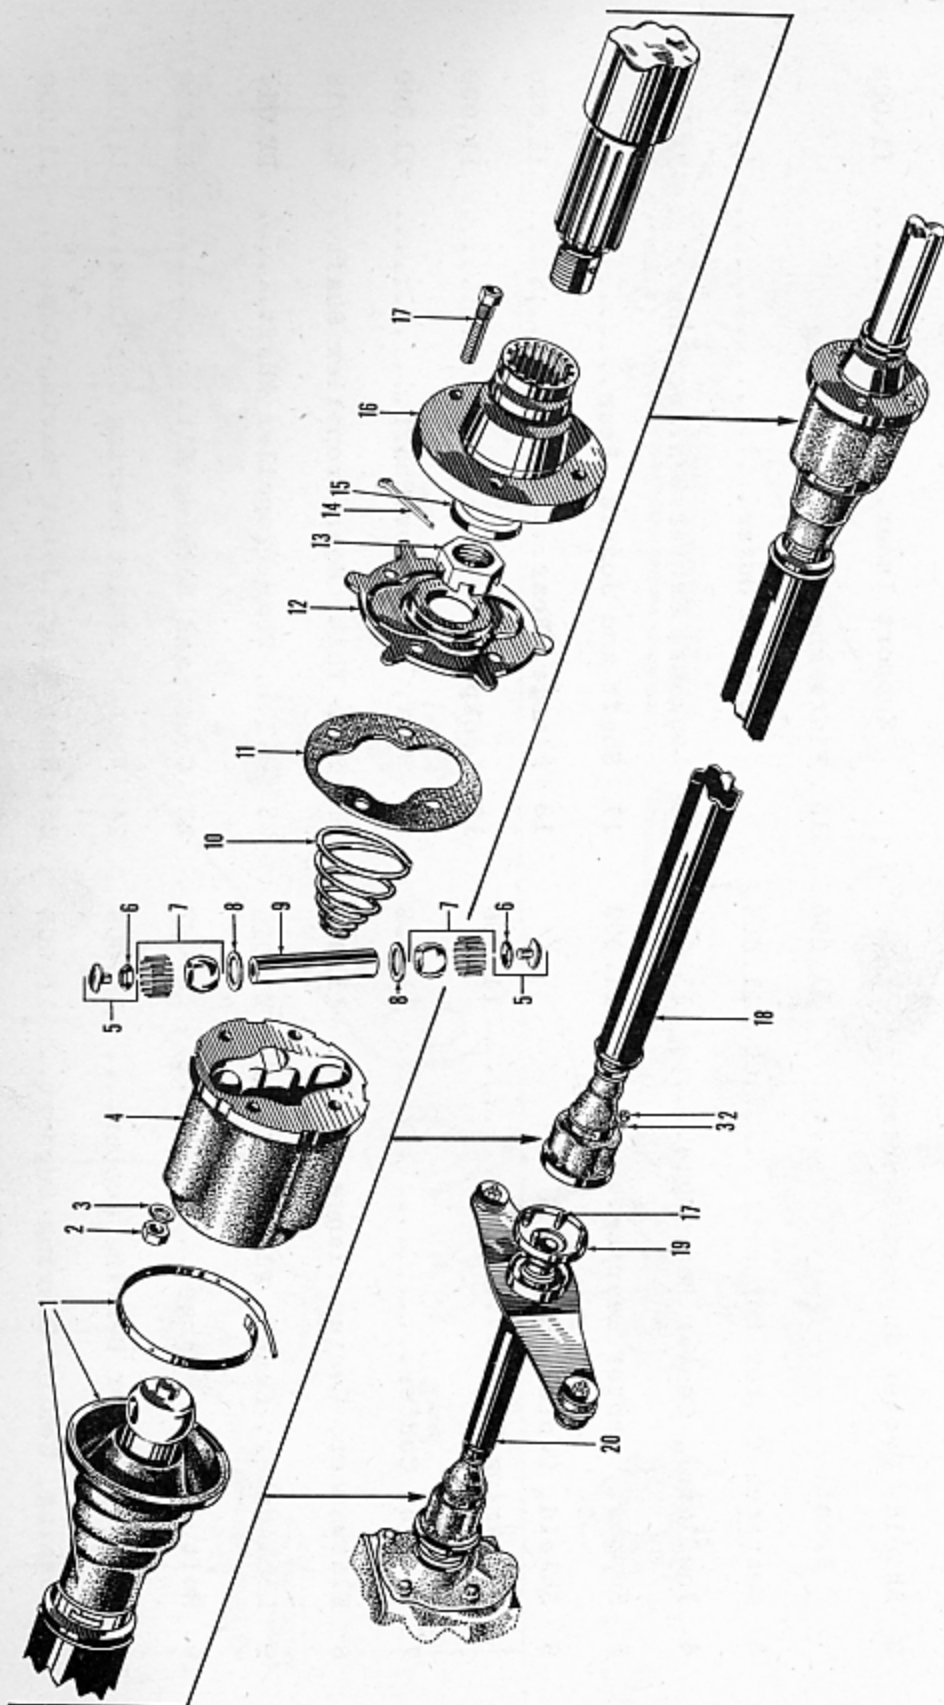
PROPELLER SHAFT AND UNIVERSAL JOINTS - UNIVERSAL TYPE - EXPLODED VIEW
